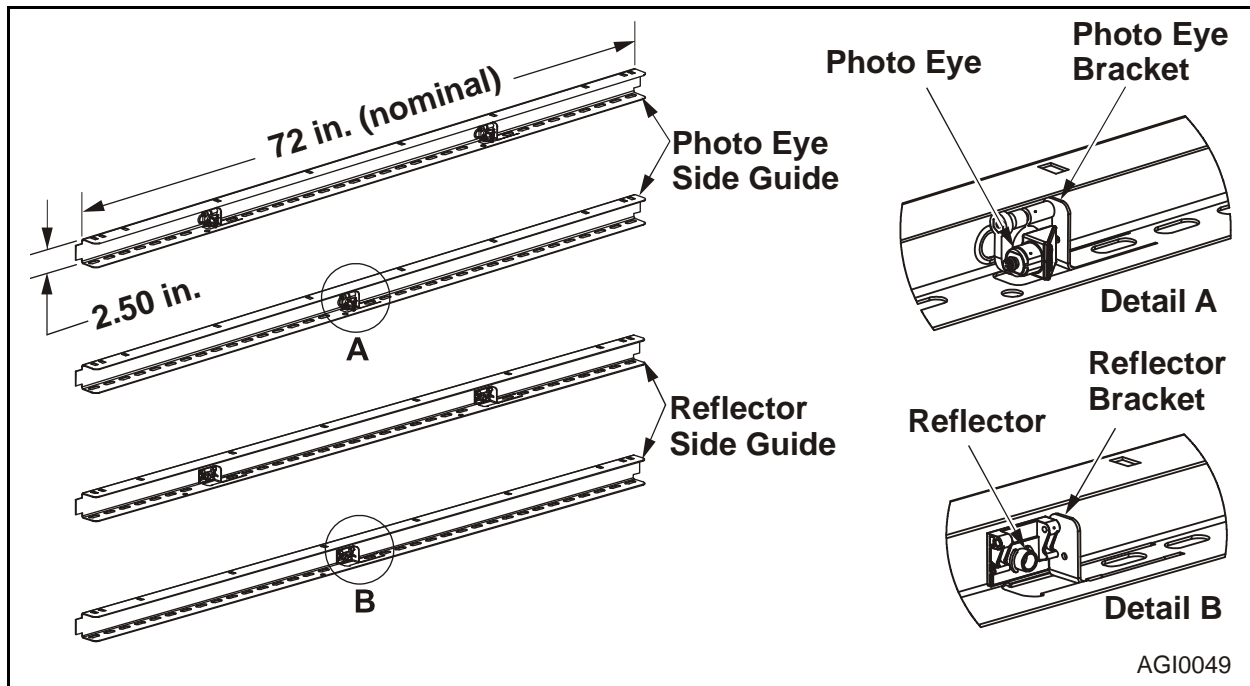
19 Photo-Eye and Reflector Side Guides
